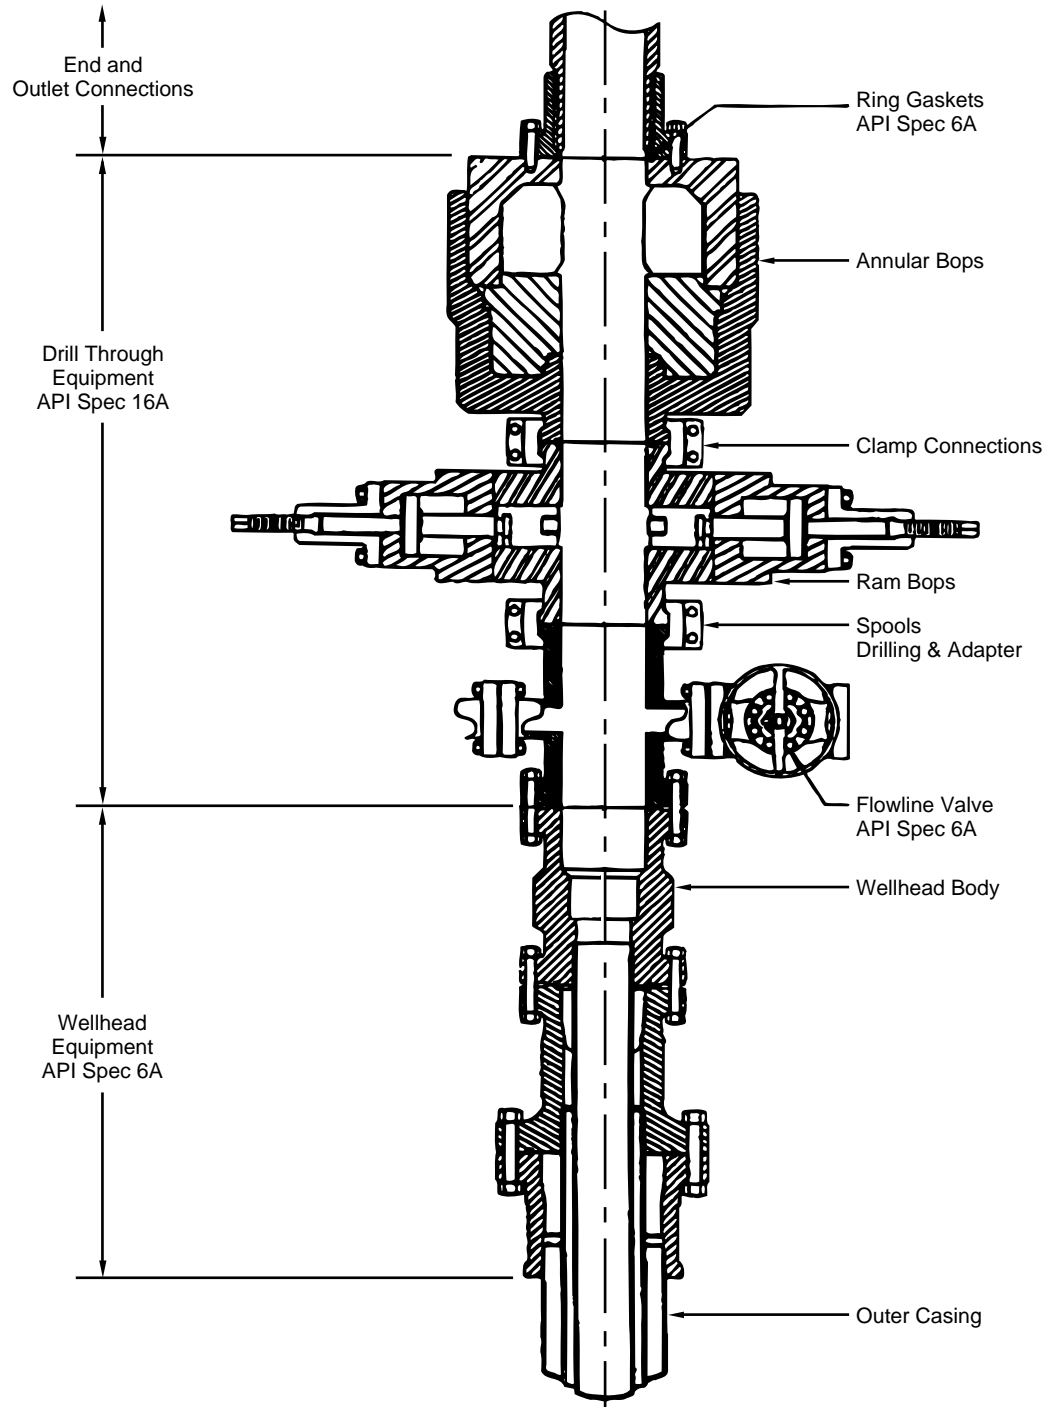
Drill Through Equipment (Typical Surface Equipment)
